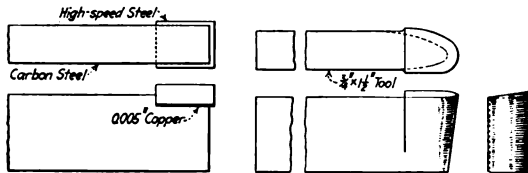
METHOD FOR WELDING IN FURNACE
